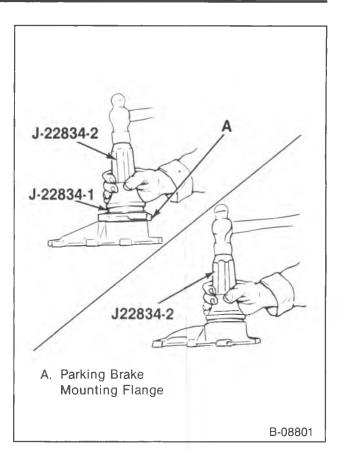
Installing the Rear Bearing Retainer Oil Seal
